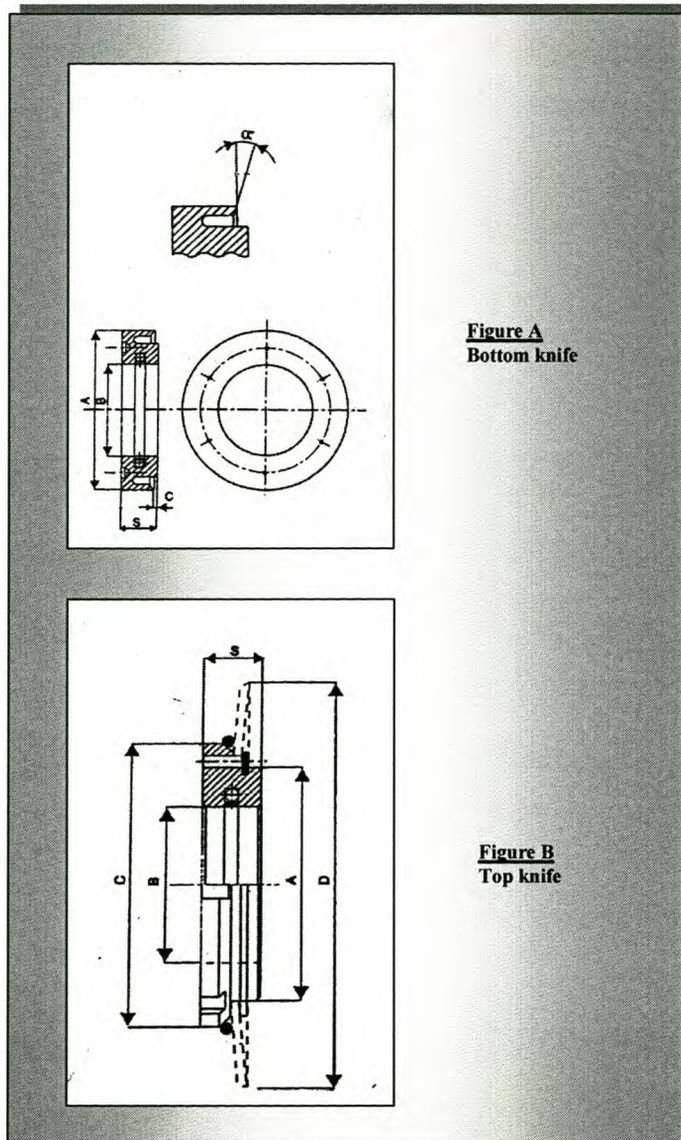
Assembly of the bottom (Fig. A) and top (Fig. B) knives for the slitting section (Barkev Coatings technical data sheet).
